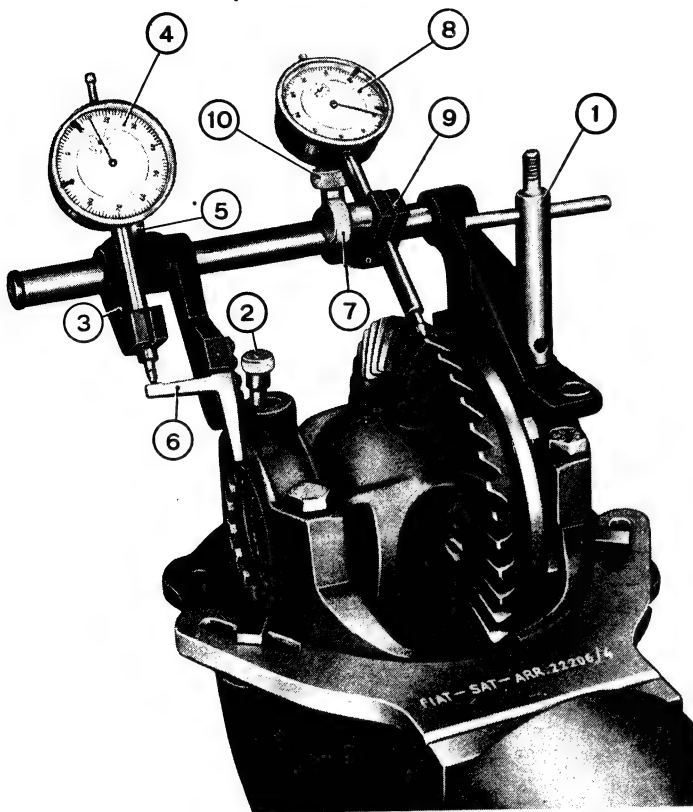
Checking ring gear-to-pinion backlash and differential case roller bearing preload using fixture A. 95688.
